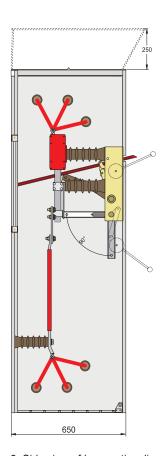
Side view of bus sectionalizer panel FÜ24-756519-72 with switch disconnector H27 EK
